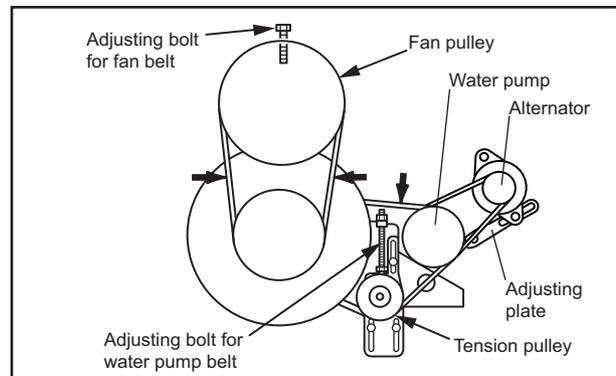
V-belt and belt tension - Inspect and Adjust
